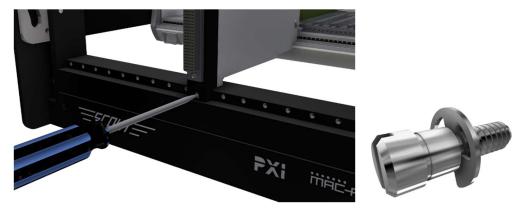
Extract the DAK from the chassis backplane using the jack screw.
